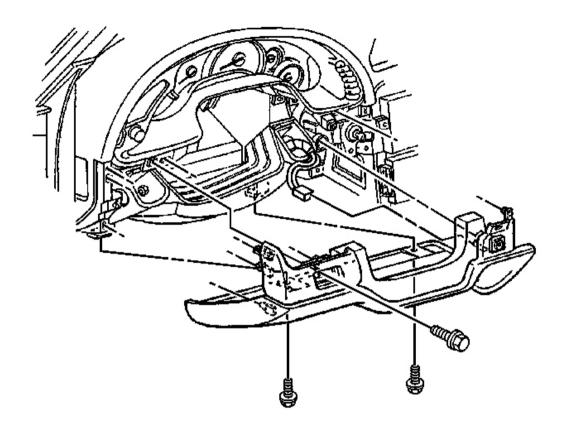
TORX(R) Head Screws, Lower Trim Cover & Driver Knee Bolster Trim Panel Courtesy of GENERAL MOTORS CORP.
